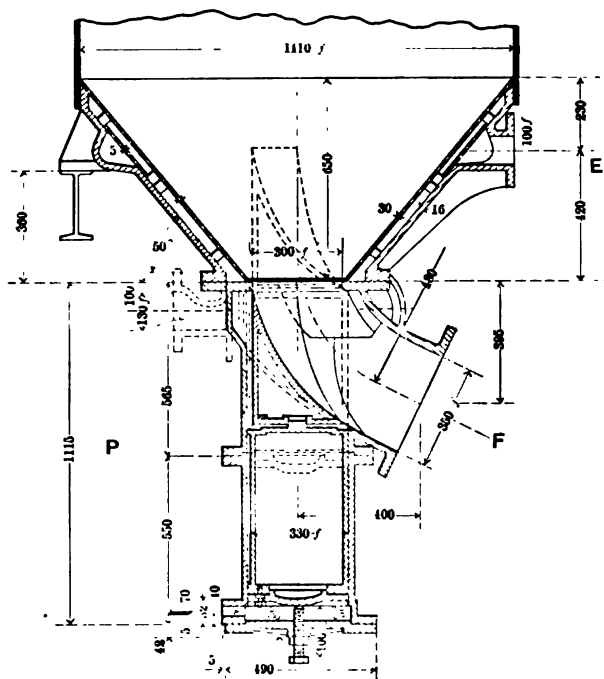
PFEIFFER Diffusor, Sectional View.
